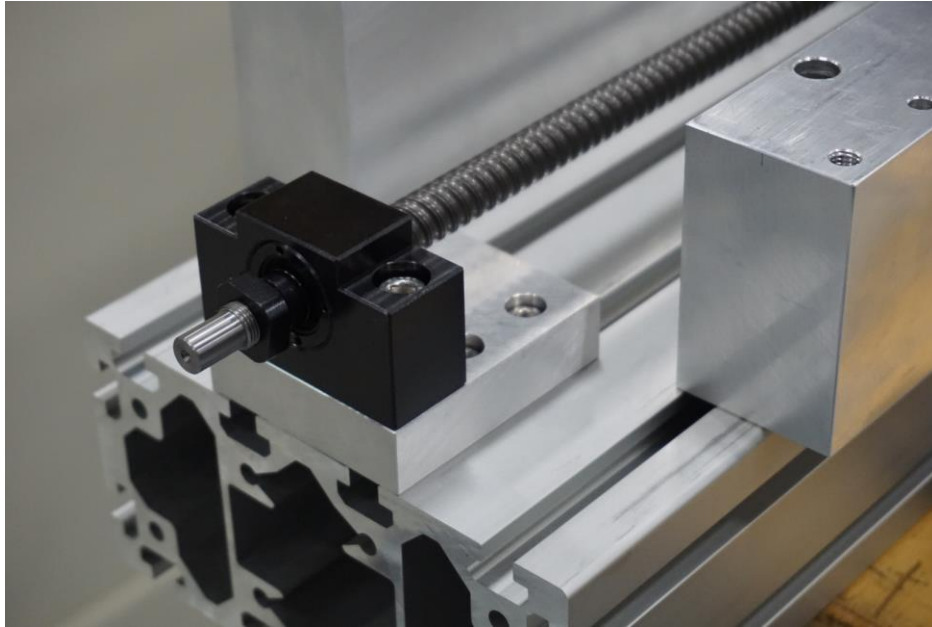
The ball screw attached to the extruded aluminum baseplate during assembly.
